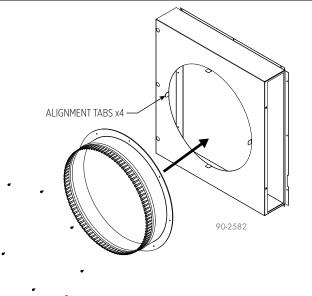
ATTACH ASSEMBLED DUCT HOUSING
